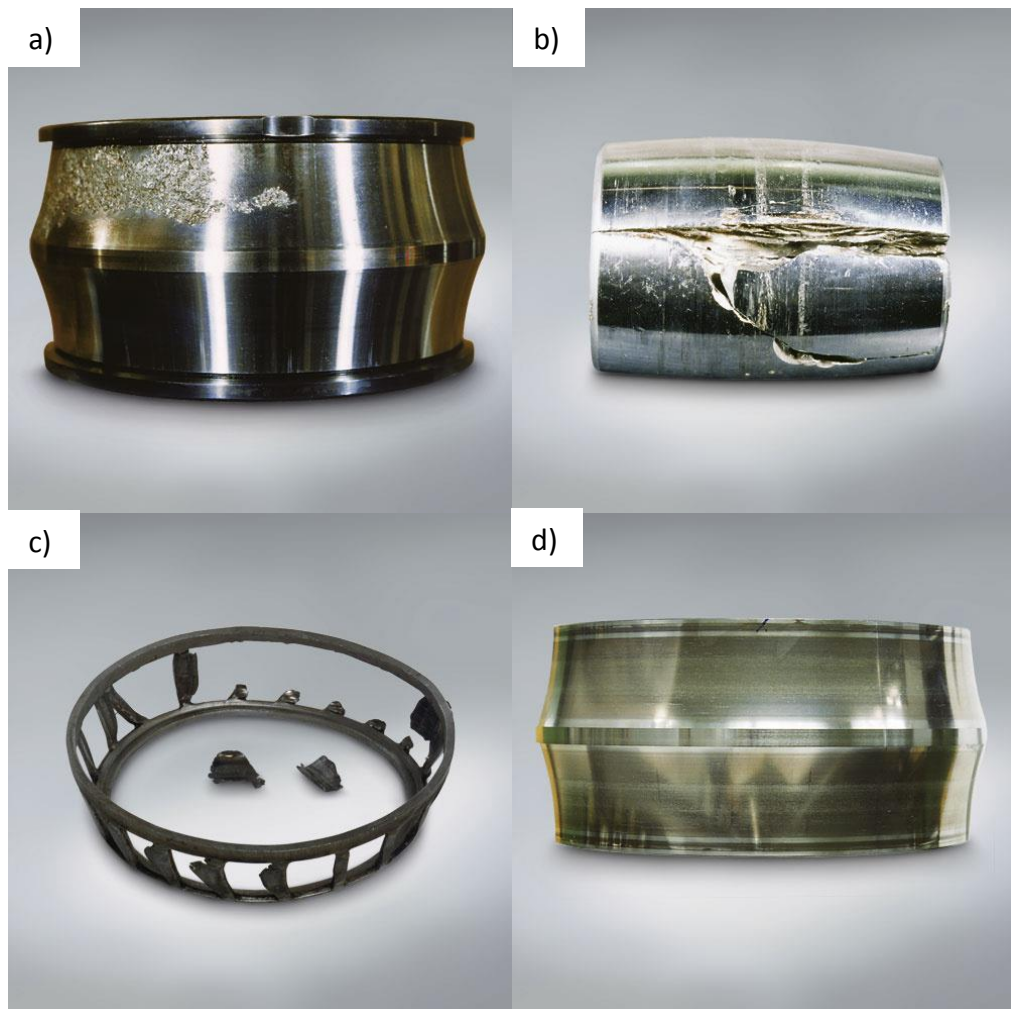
Examples of bearing damage showing a) Flaking of the inner raceway due to poor lubrication, b) Axial cracking of a roller, c) Cage Pillar Failure and d) Smearing due to poor lubrication – Extracted from (NSK, 2009)
